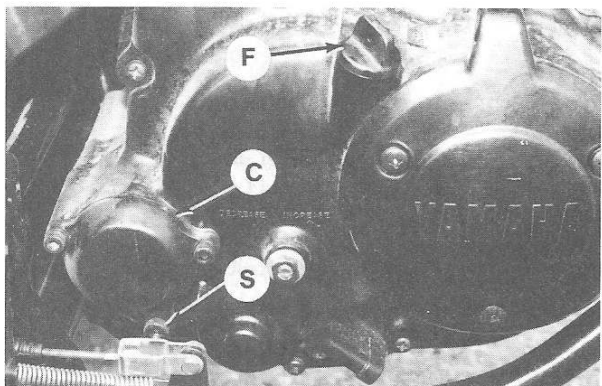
View showing location of oil fill plug (F). A dipstick is attached to the plug. The oil filter is located behind cover (C).
